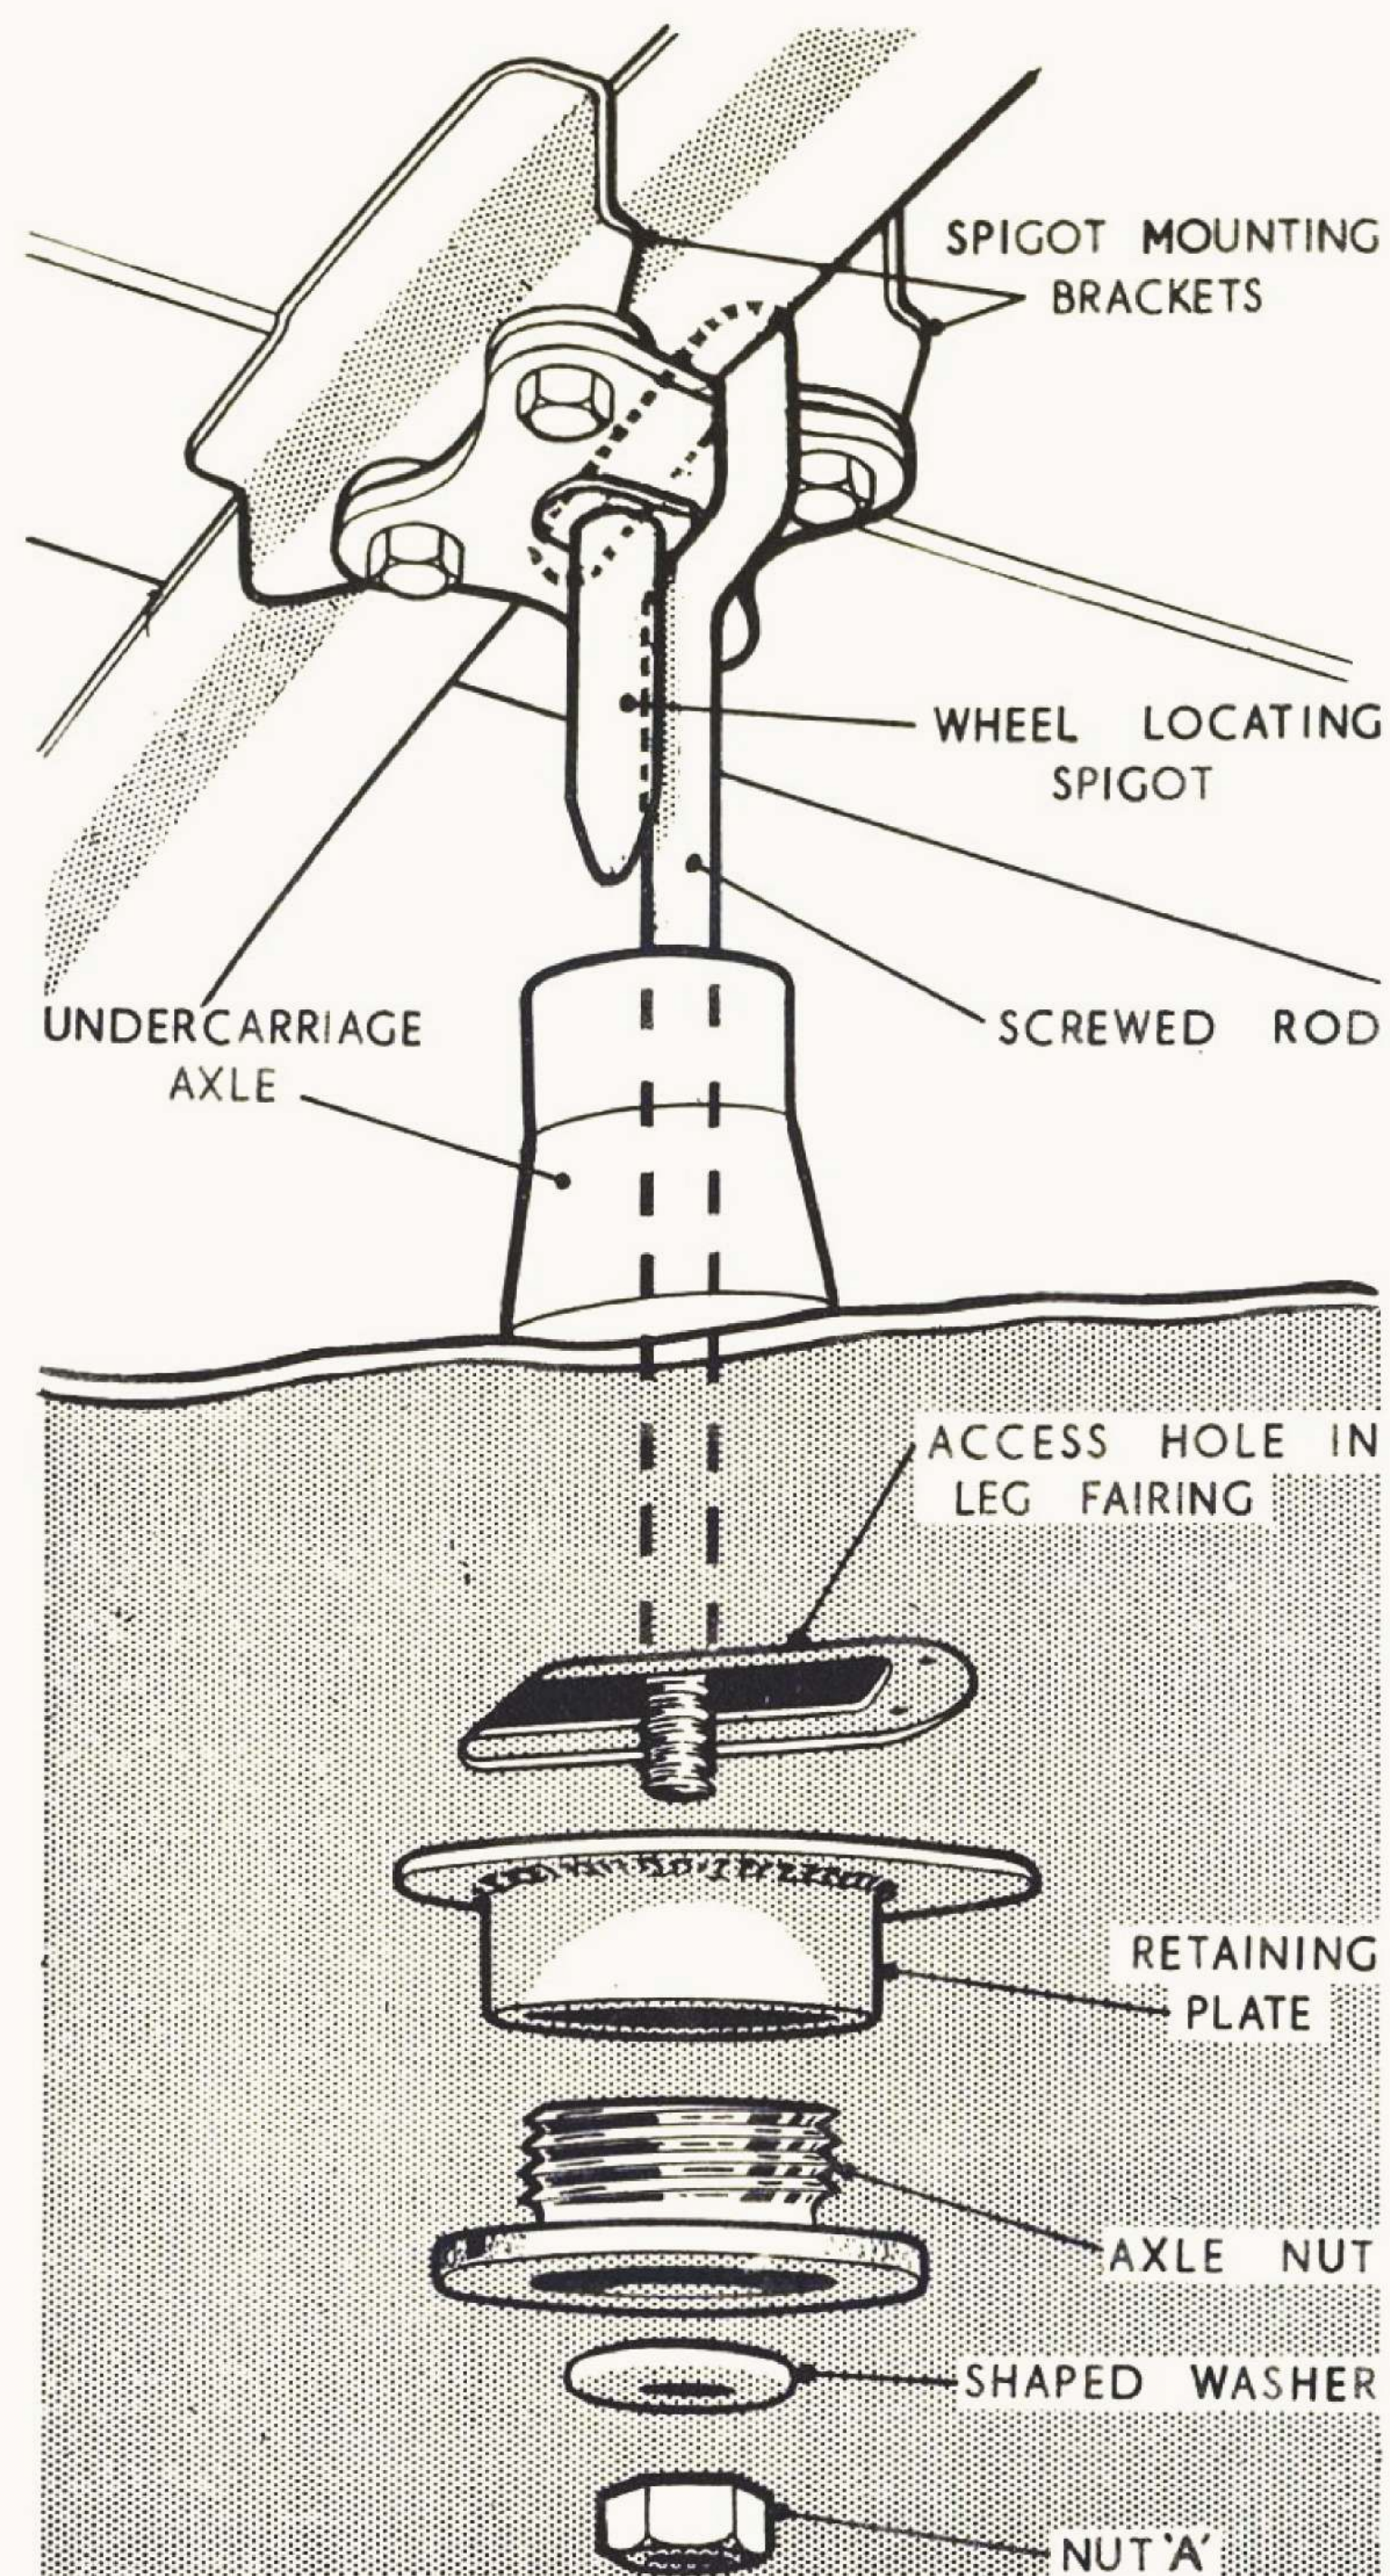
UNDERCARRIAGE UP-LOCK TOOL
